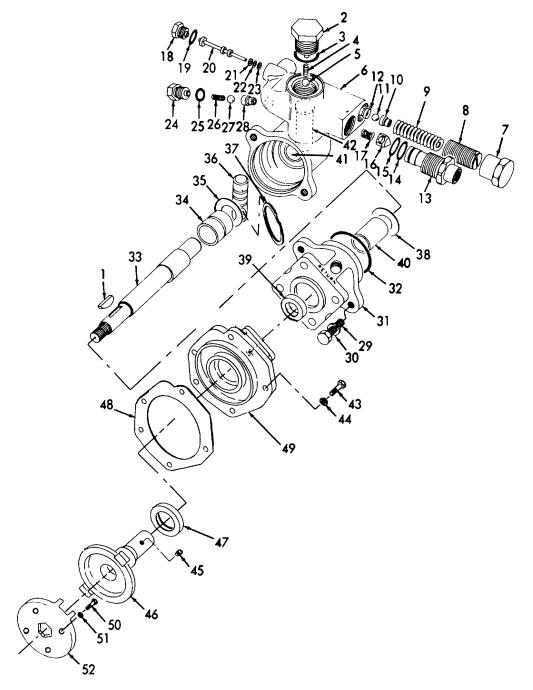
Hydraulic Pump, Disassembly/Reassembly.
